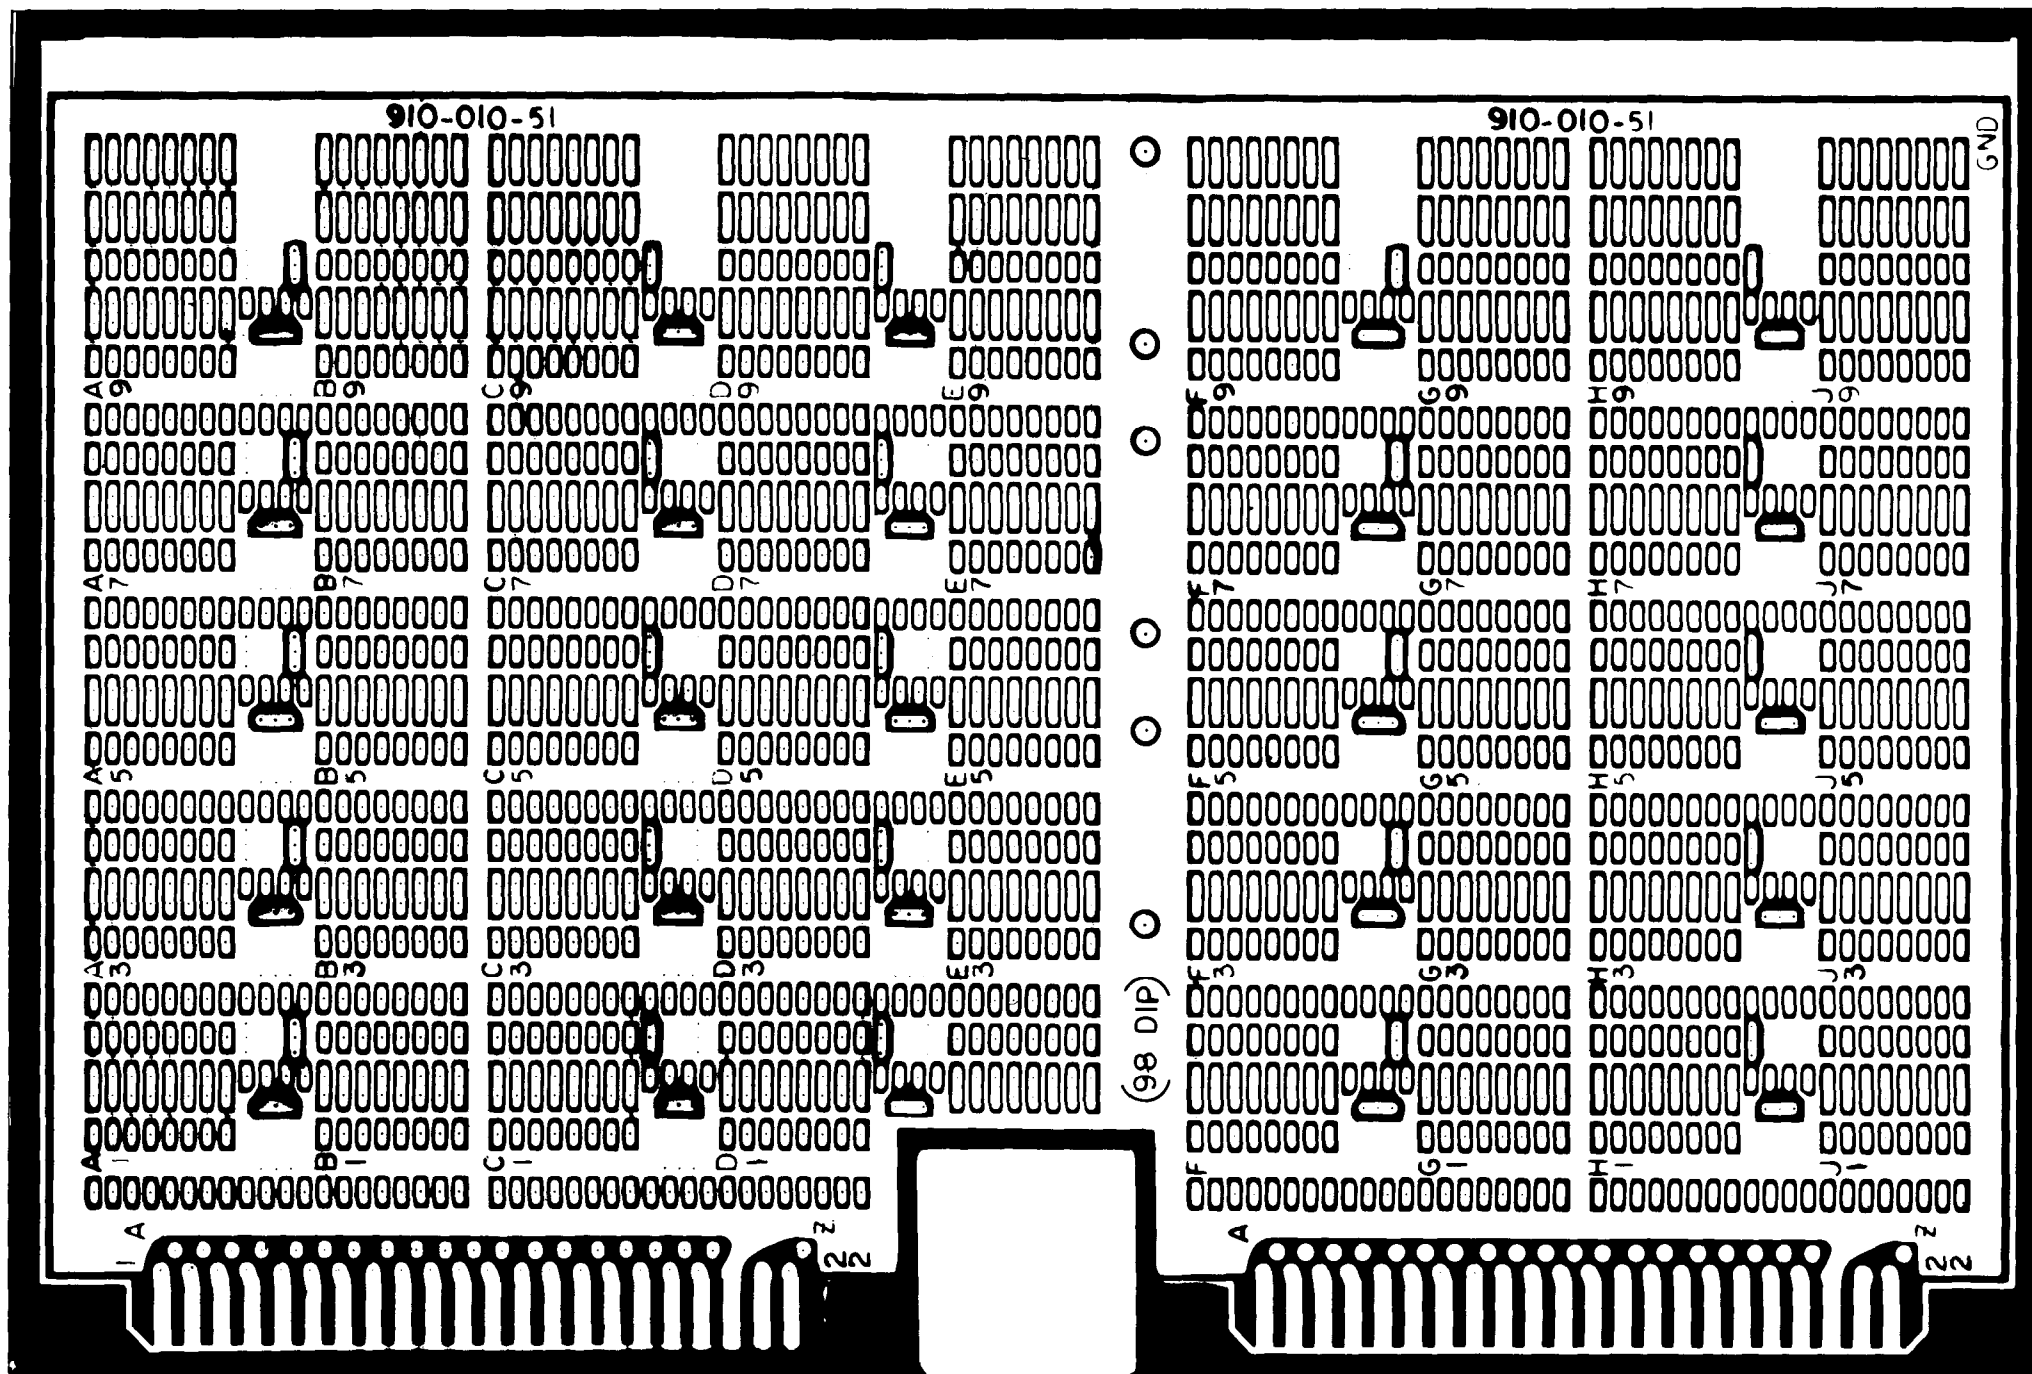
98 DIP Socket PC Card, Artwork, Wiring Side
